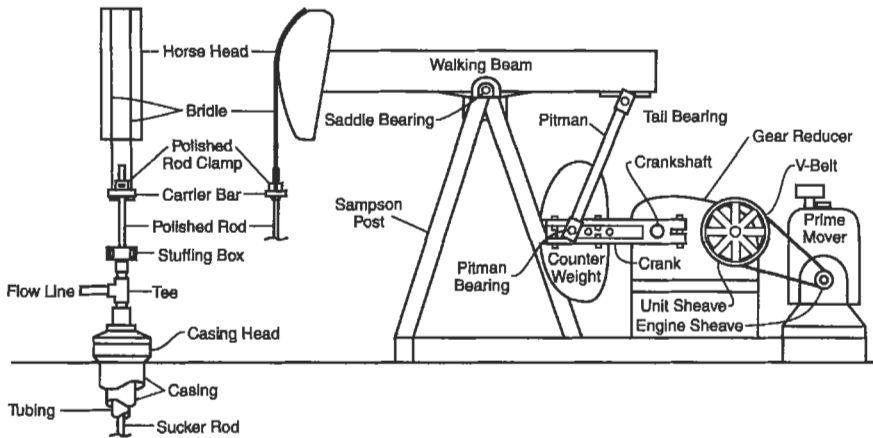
Surface equipment of a sucker rod pumping installation [60].
